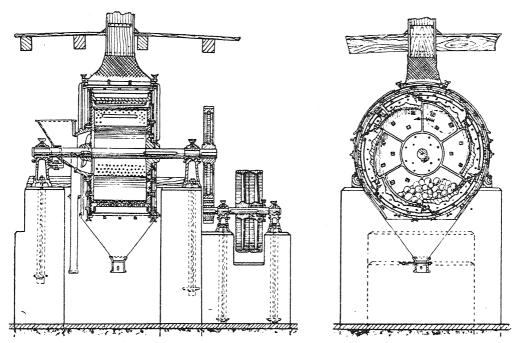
KRUPP BALL MILL (SECTIONS)
